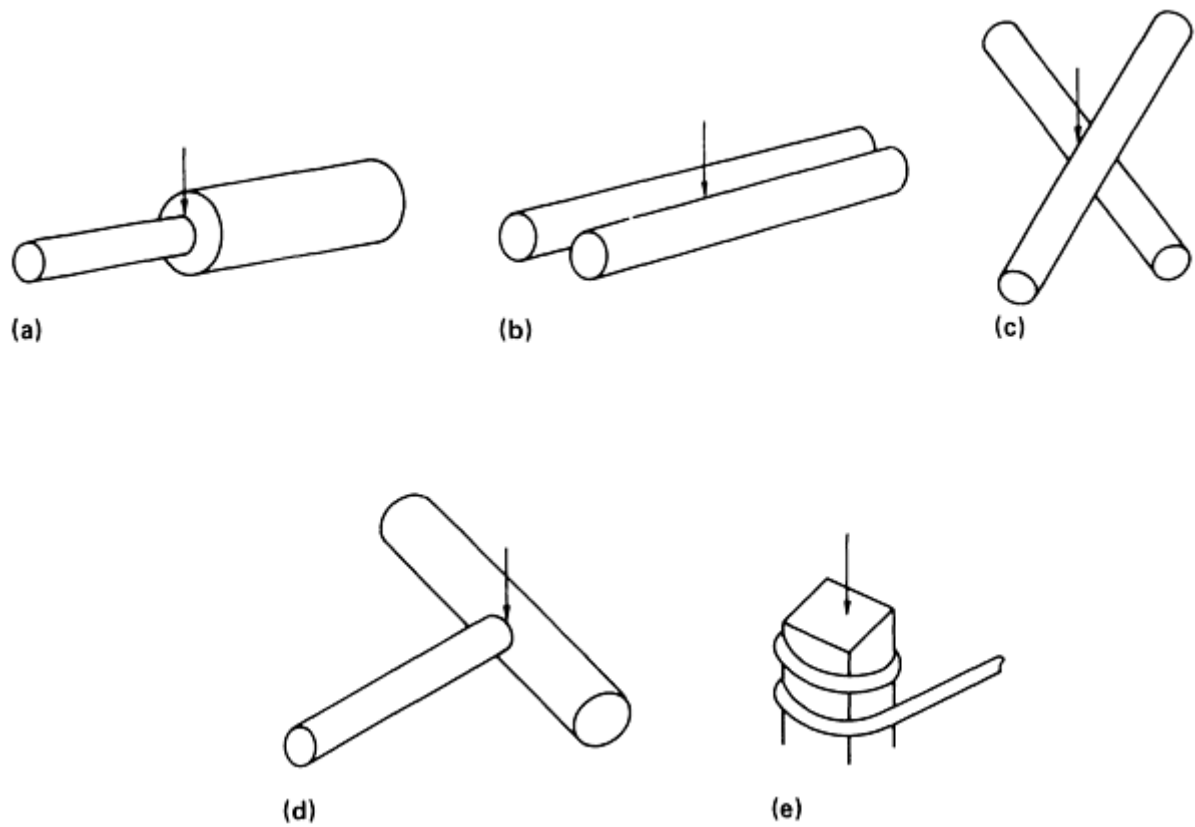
JOINT DESIGNS FOR LASER-BEAM WELDS ON WIRE. ARROWS SHOW DIRECTION OF LASER BEAM. (A) BUTT WELD. (B) ROUND-TO-ROUND LAP WELD. (C) CROSS-JOINT WELD. (D) SPOT WELD FOR T-JOINT. (E) TERMINAL OR LUG WELD
